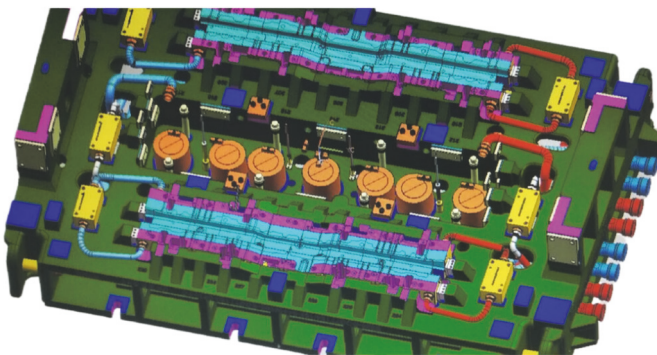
Synchronization of the contact and consistency of the contact pressure of two parts in one mold using in-mold springs.
